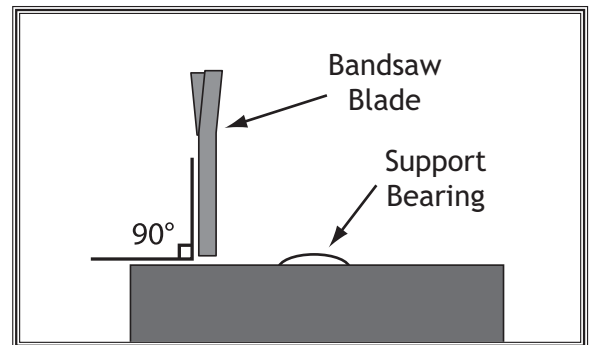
Blade should be perpendicular (90°) to the face of the support bearing.
